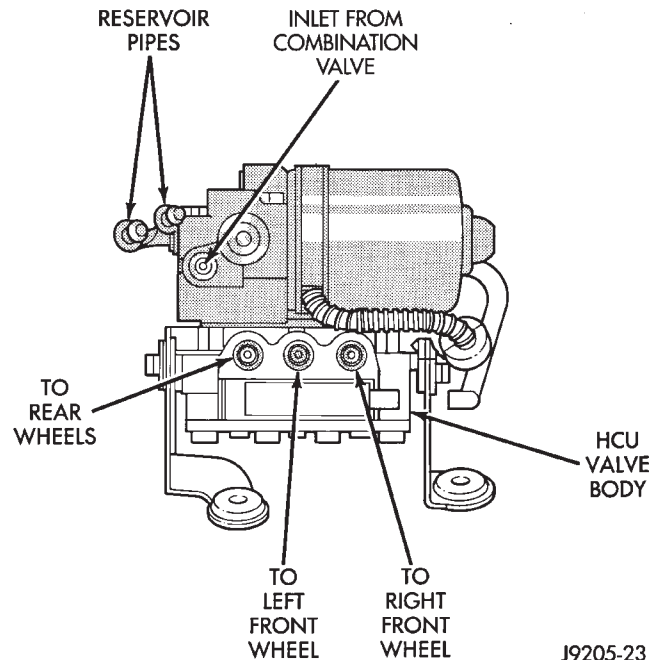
HCU Mounting (Right Hand Drive XJ)
